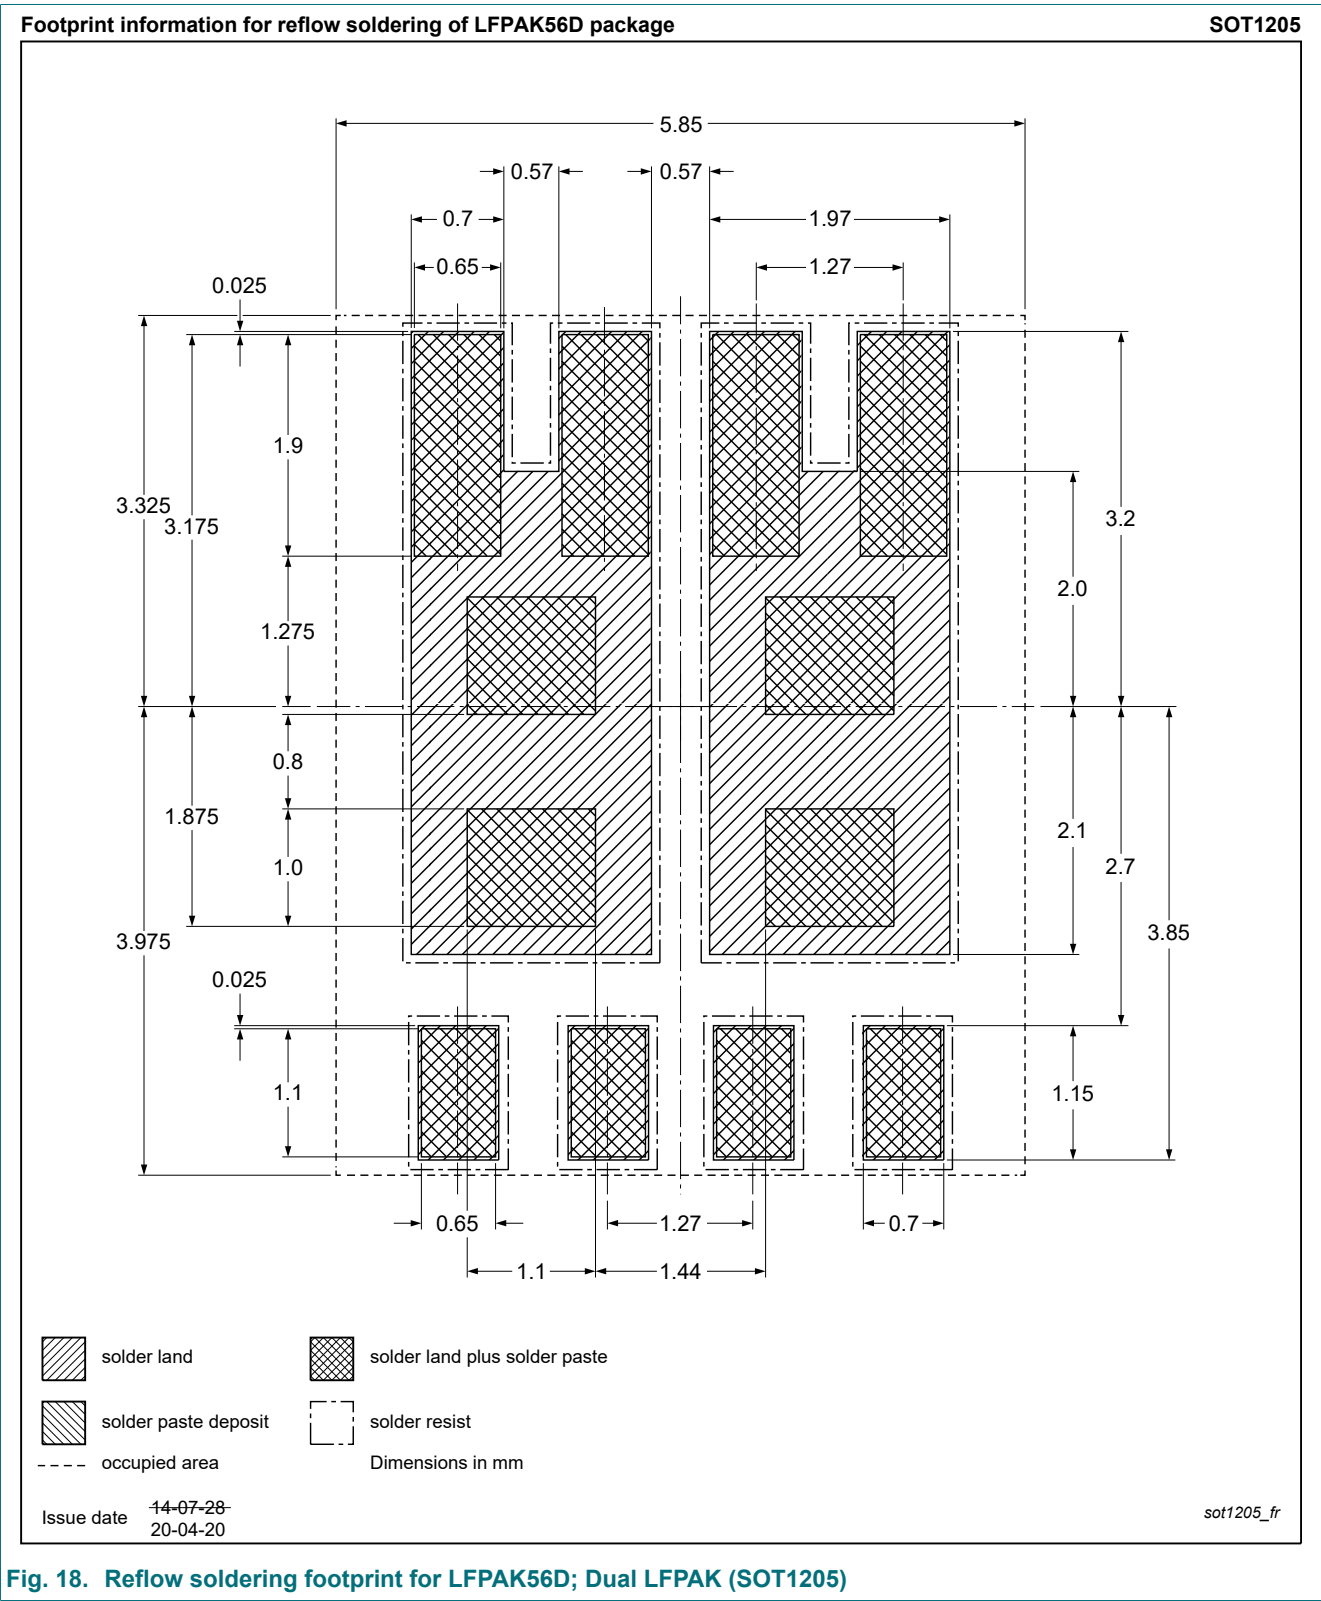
Reflow soldering footprint for LPAK56D; Dual LPAK (SOT1205)
